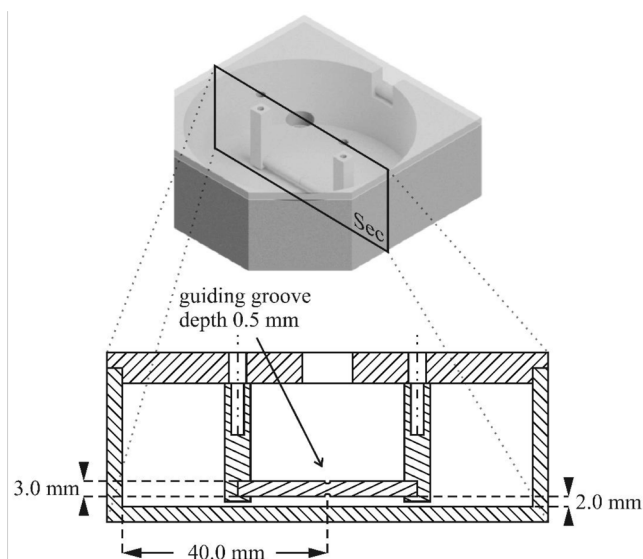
Three-dimensional (3D) model and cross-section of the resin tub used for dip coating.
